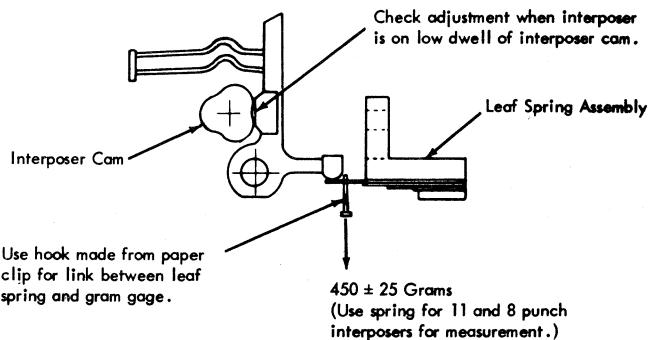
Interposer Leaf Spring Assembly Adjustment
